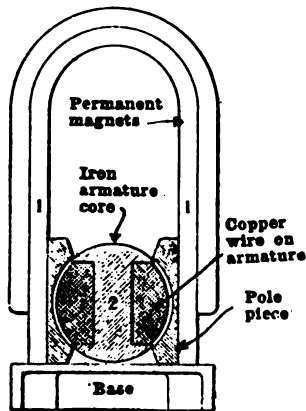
View of a low tension magneto with the end plate off and armature shown in section.
